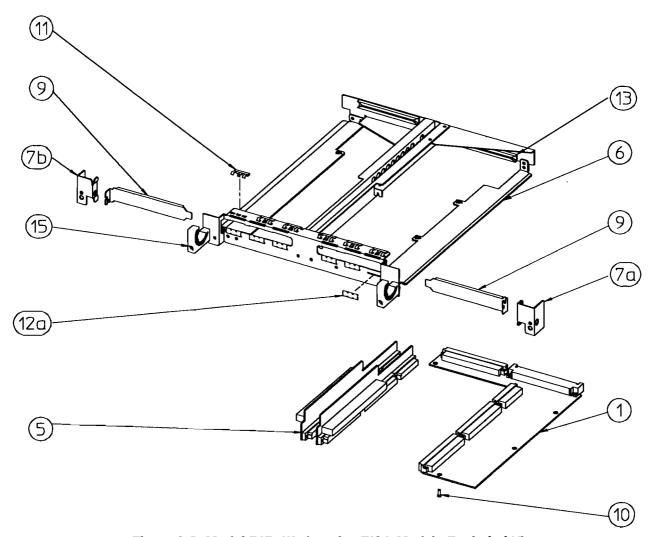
Model 747i Workstation EISA Module Exploded View
